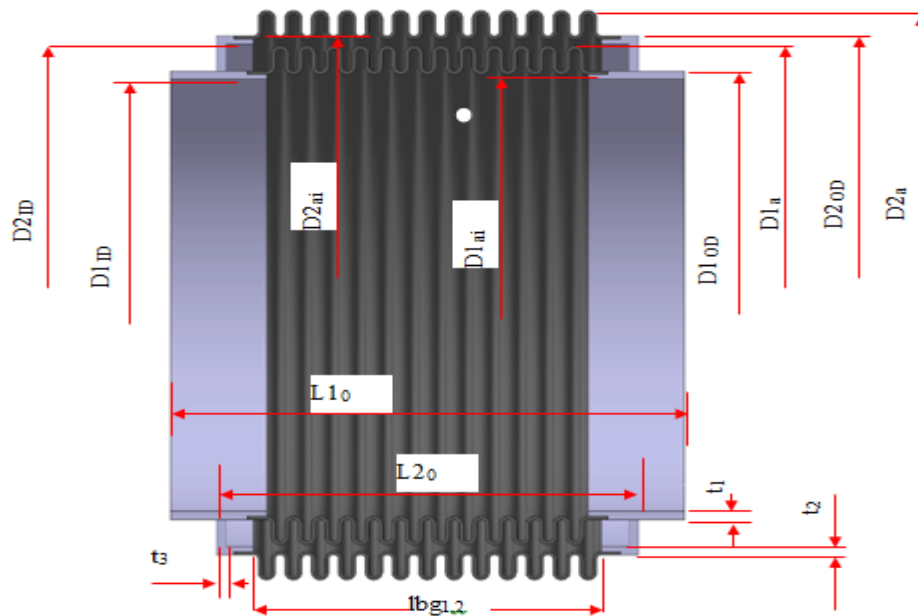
Double bellows assembly for RD/BV Assemblies
